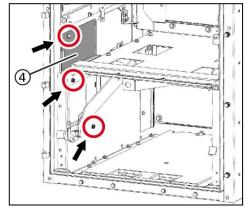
3 bolted joints on wiring duct cover, panel width 800 mm
